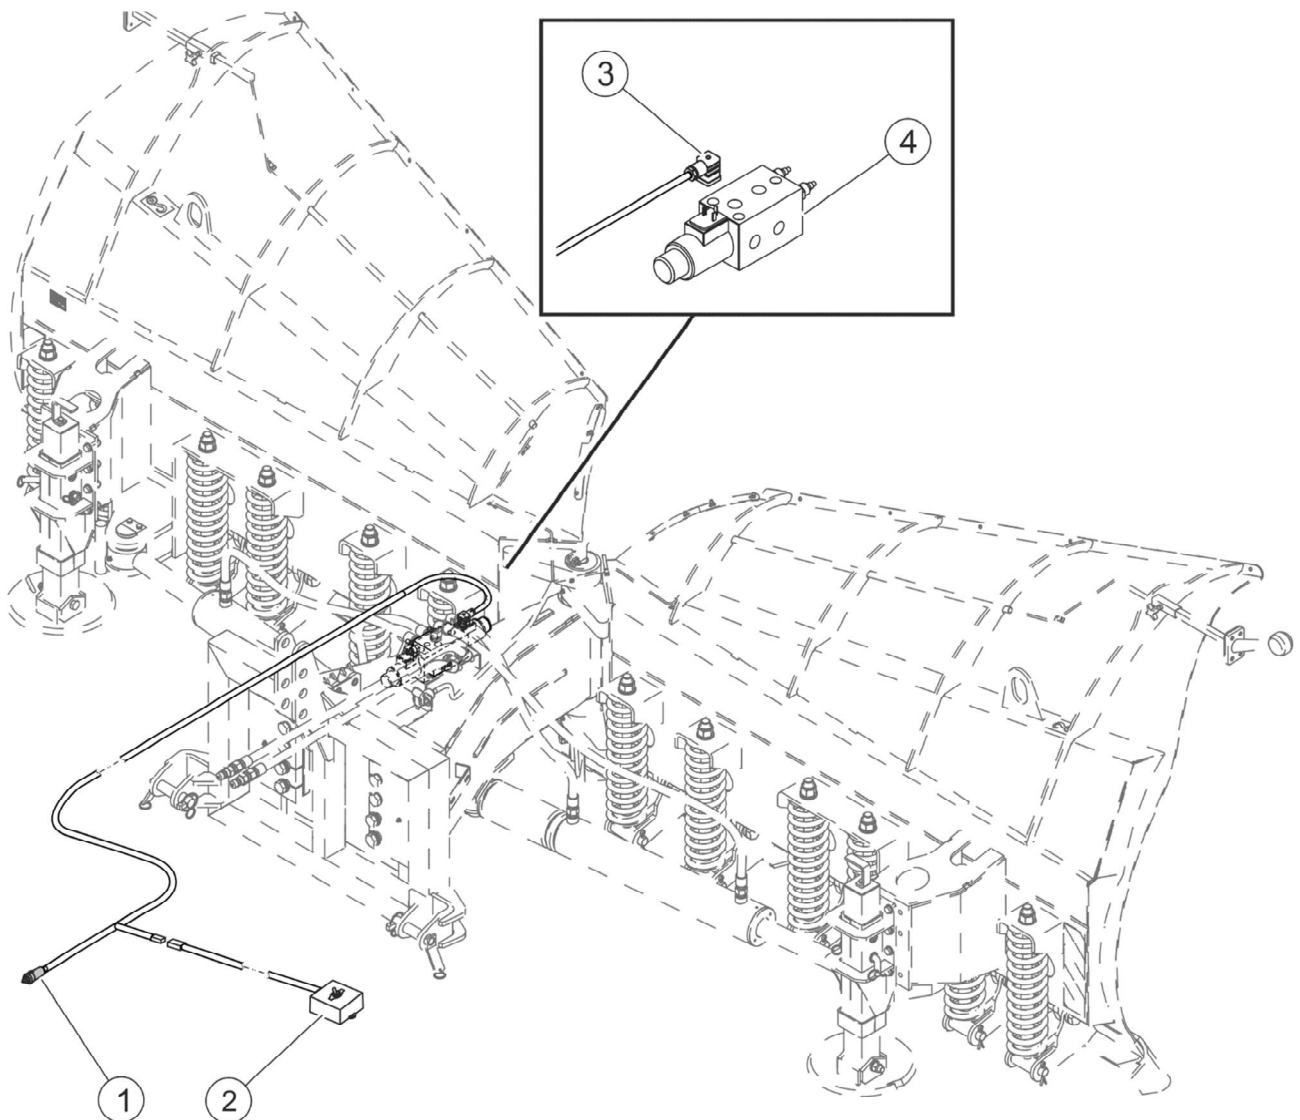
Design of solenoid valve electrical control system (independent control)
